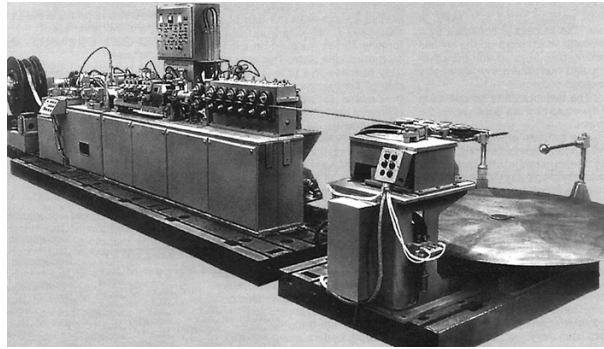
Argon-arc tube-welding mill ADST5– 25-1M.
